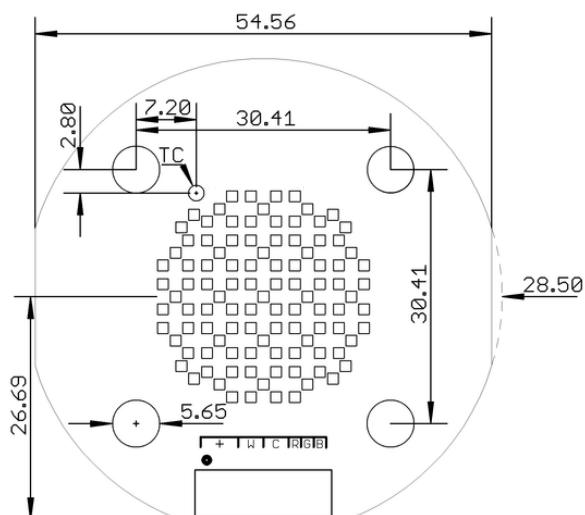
L5xxD-RGBxxxxy Mechanical Drawing
